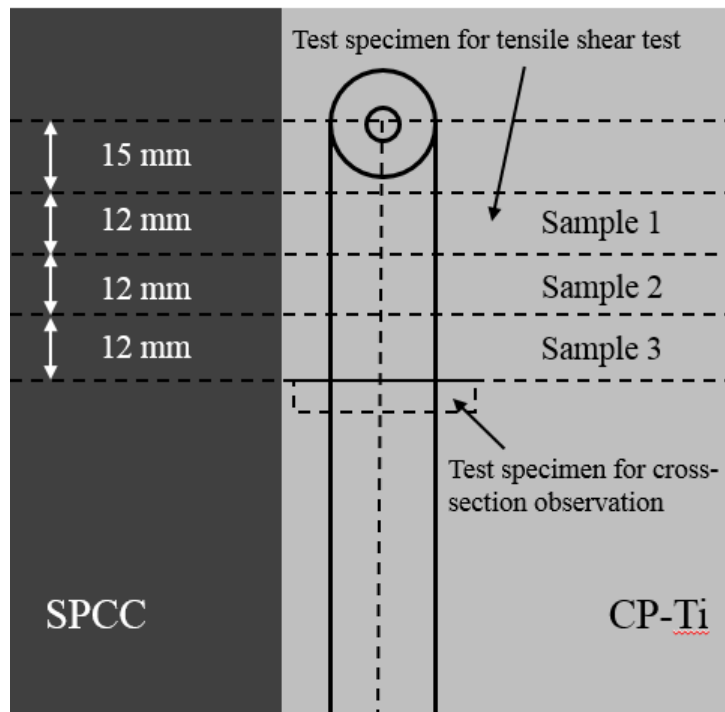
Dimension and cutting positions of the specimens for tensile shear test and cross-section observation in FSW lap joint.
